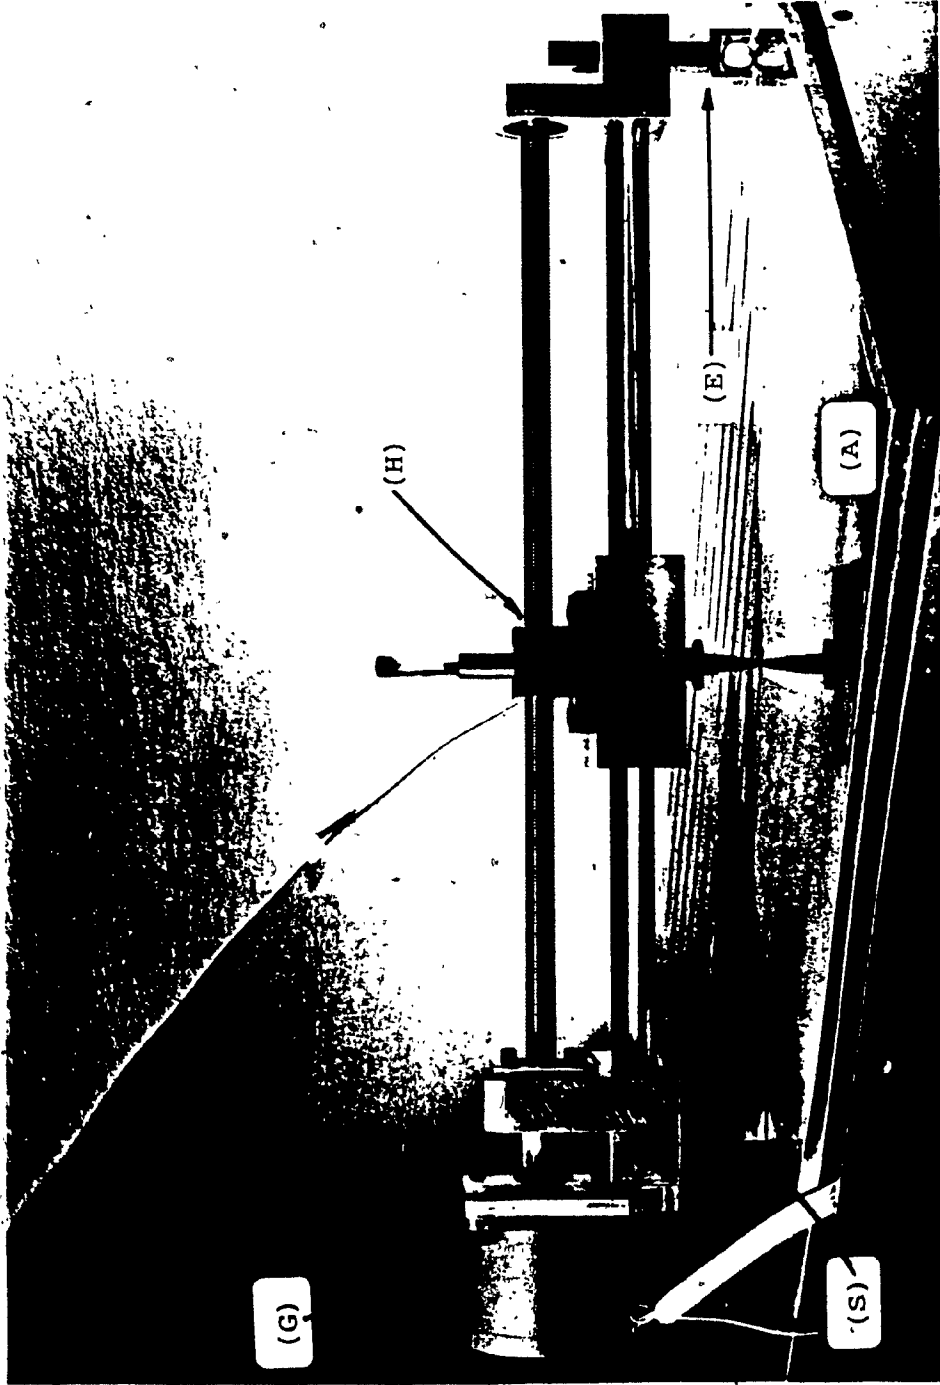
b: NC Machine Arm and Carriage Assemblies.
